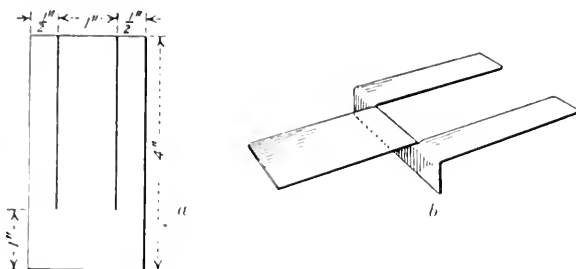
TEST PIECE FOR TEARING TESTING (1, BEFORE BENDING; 2, AFTER BENDING)
